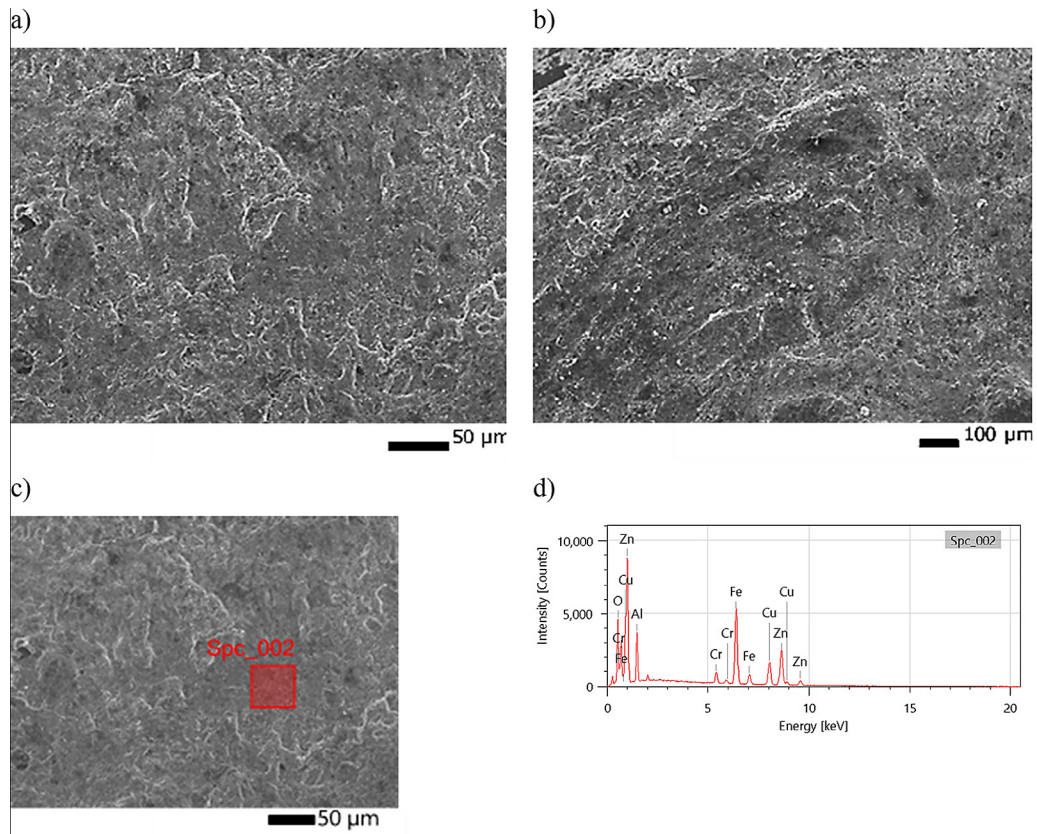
Surface of the electrode that made 500 welds with EDX analysis
